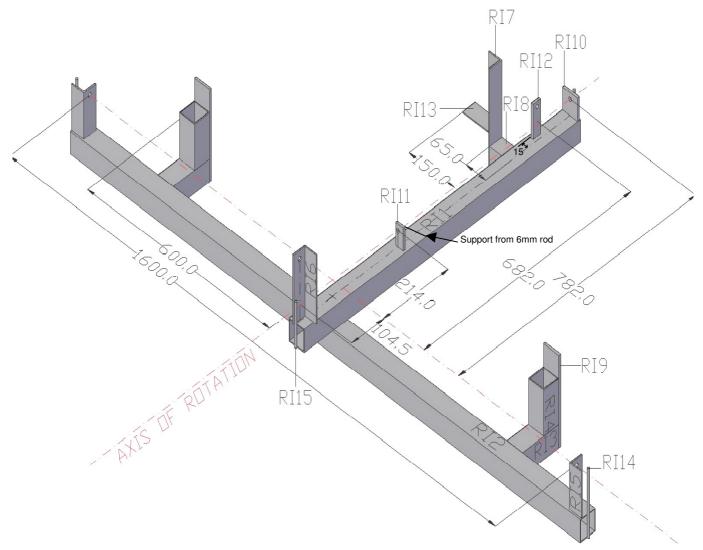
Rotating Support Jig See also plans in 10.4 Plan, Fig.90-91
